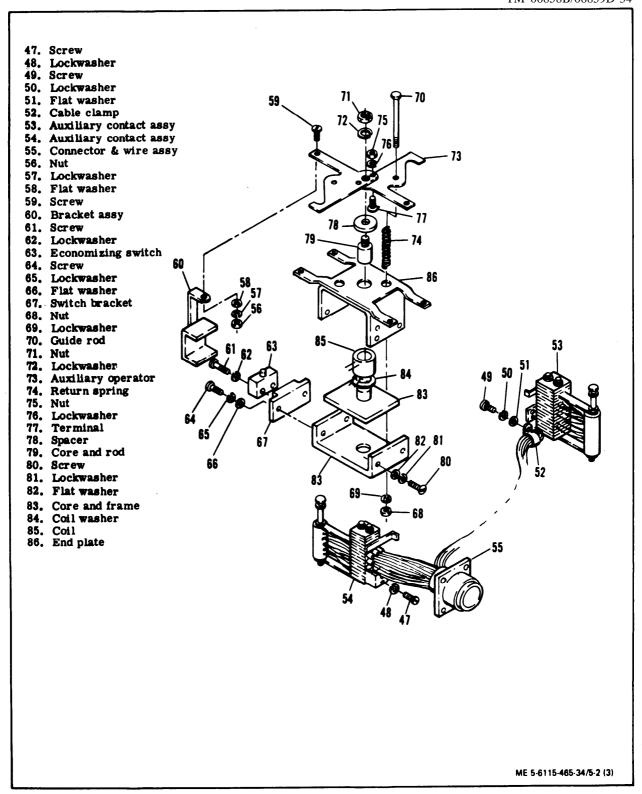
Main Load Contactor, Exploded View (Sheet 3 of 3)
